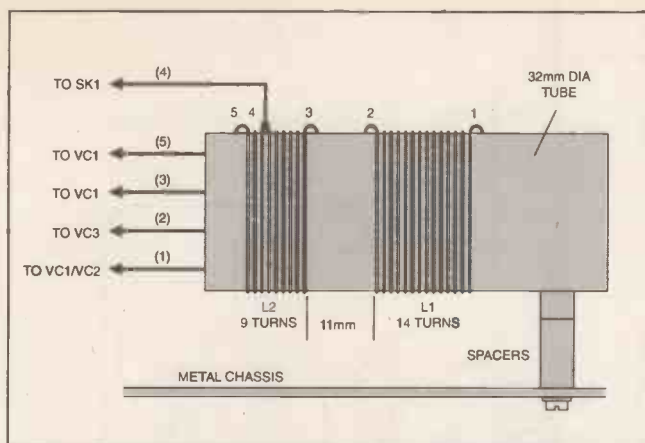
Details of the home-made tuning coil. The plastic coil former measures 32mm diameter by about 65mm length. Strips of tape can be used to stop the windings unravelling – see photograph right.
